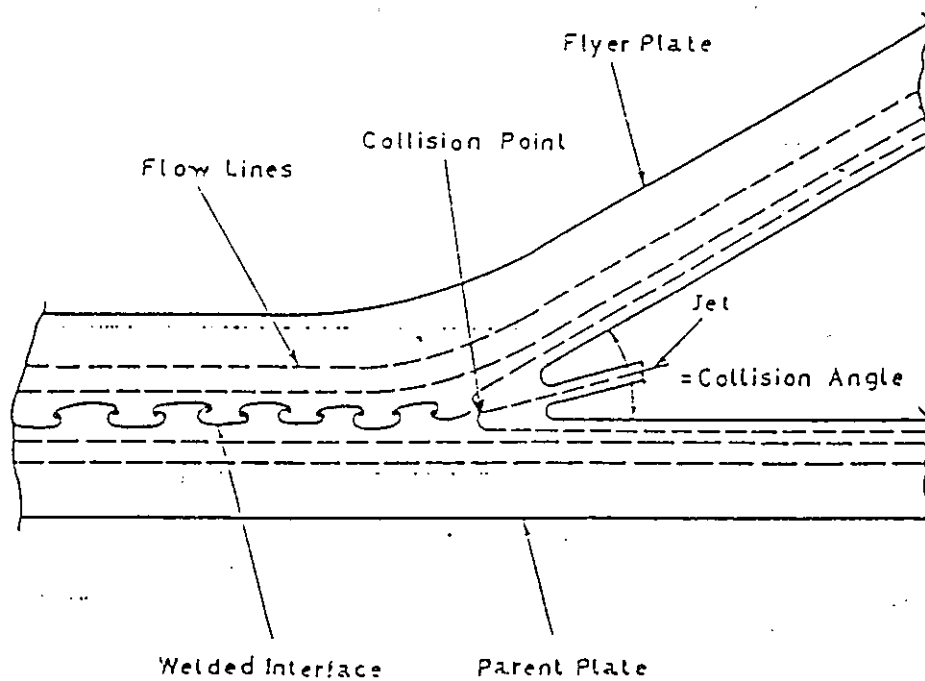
Illustration of plate-collision process and resultant jet during explosive welding
